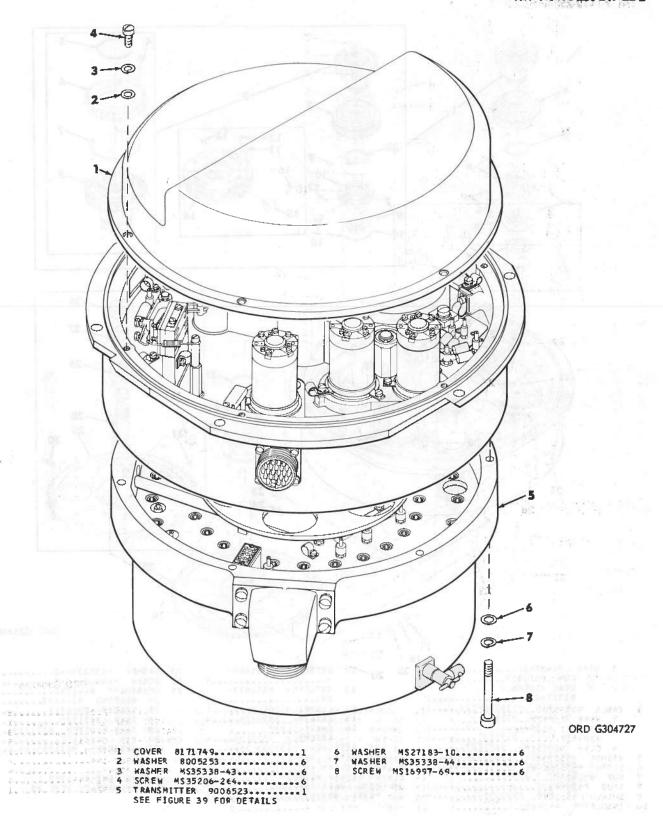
TRANSMITTER, POSITION, GUIDED MISSILE /9007947/-PARTIAL EXPLODED VIEW /SEE FIGURE 5 FOR NEXT HIGHER ASSEMBLY/
